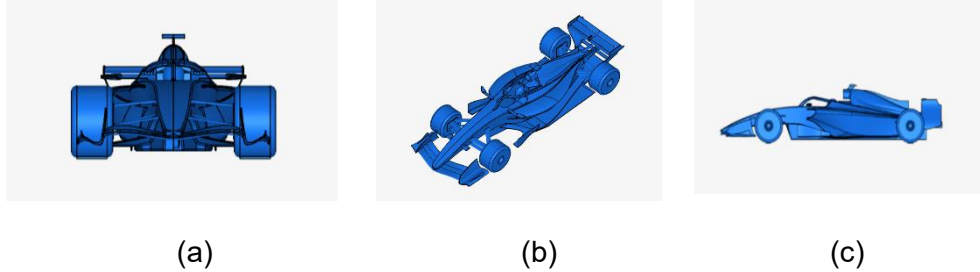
Prototype Car Design (a) Front View, (b) Isometric View, and (c) Side View
